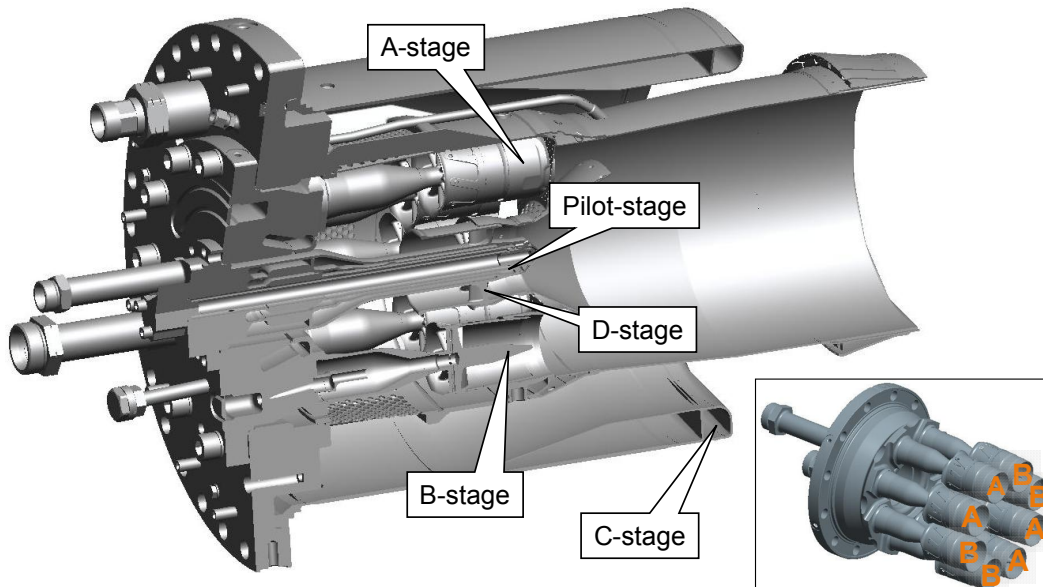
Sectional view of the ULN combustor of the SGTx-8000H engine [2].
